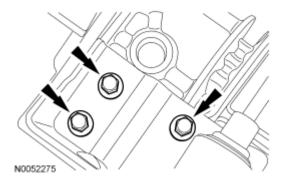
Identifying Selector Lever Cable Bracket Bolts Courtesy of FORD MOTOR CO.
